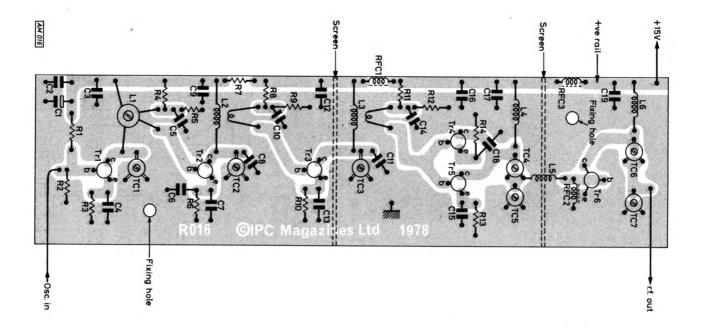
Component layout of Board 2. Note components soldered direct to copper side of p.c.b. (see text)
